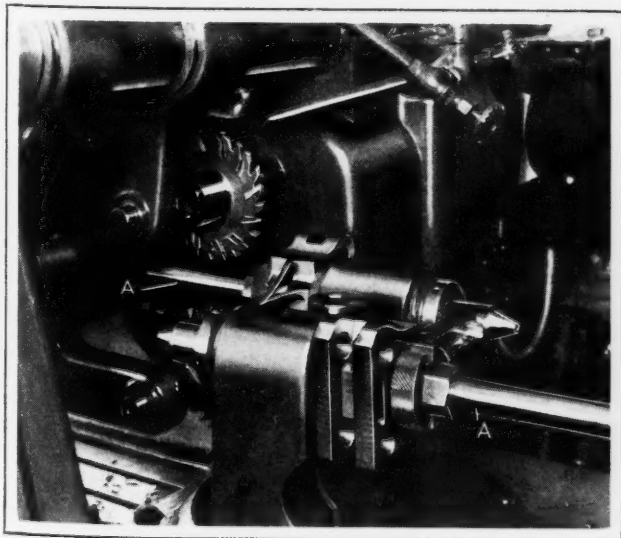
Splitting the Cap from a Master Rod Proper by Employing Two Milling Cutters
